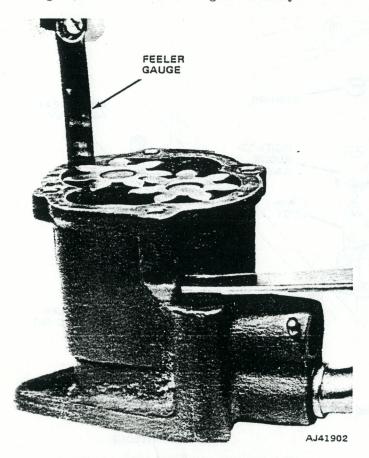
B-74 Oll Gear-to-Body Clearance Measurement
